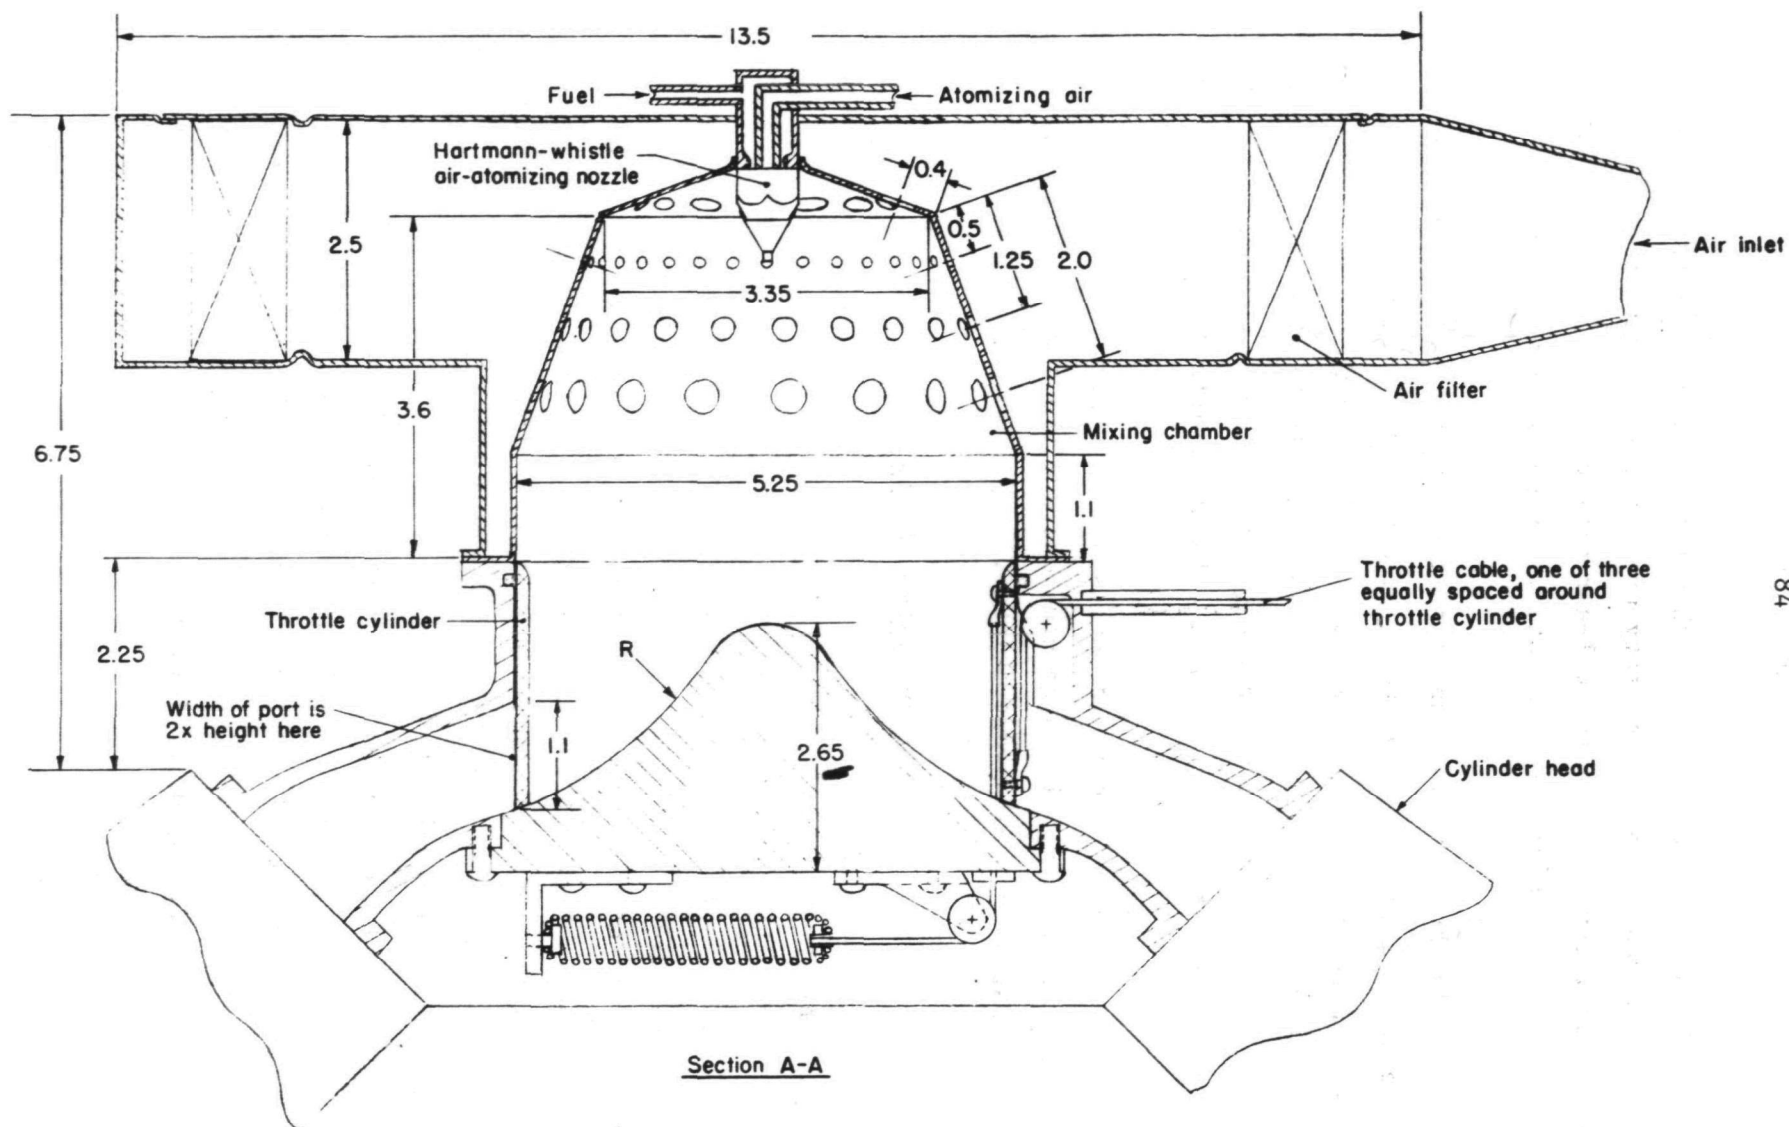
SKETCH LAYOUT OF PROTOTYPE IMPROVED INDUCTION SYSTEM-SECTION VIEW
